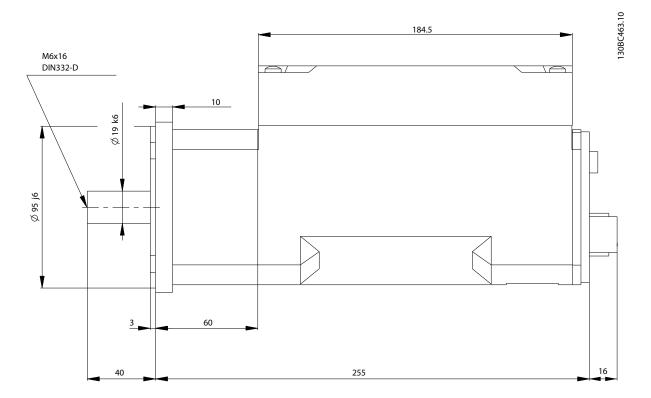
Side View: Servomotor with ISD Flange and Brake
